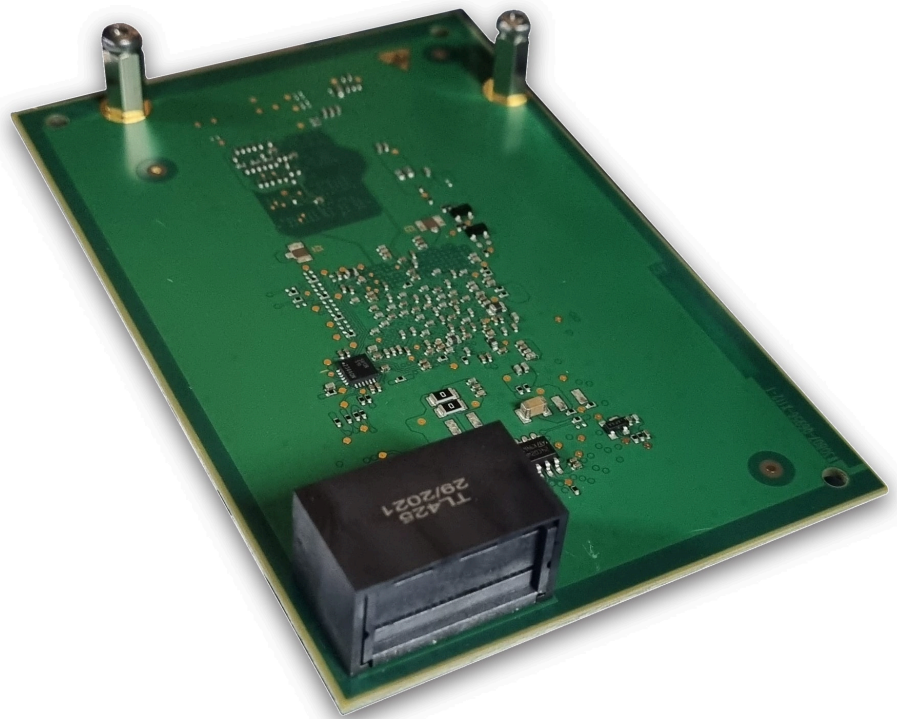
Example OCCBL- Rear side with inserted spacing bolts
